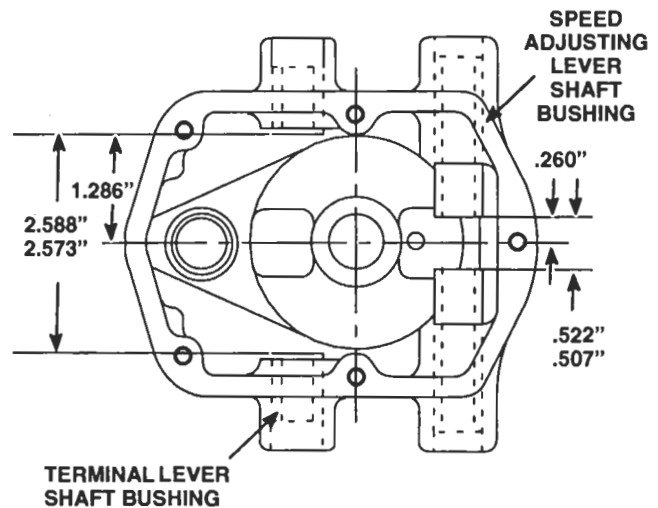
Location of Speed Adjusting Lever and Terminal Lever Shaft Bushing in Governor Housing
